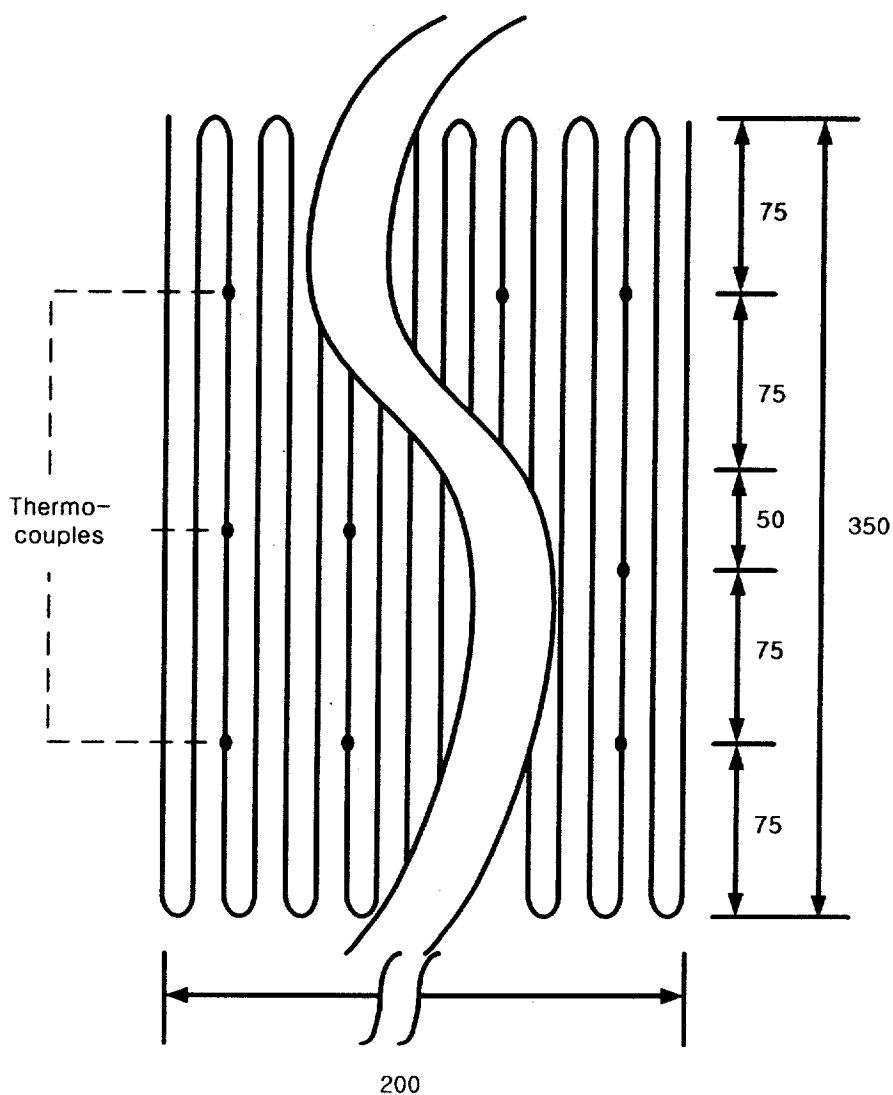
Specification of waste heat recovery heat exchanger used 347 stainless steel pipe (Unit 1).
